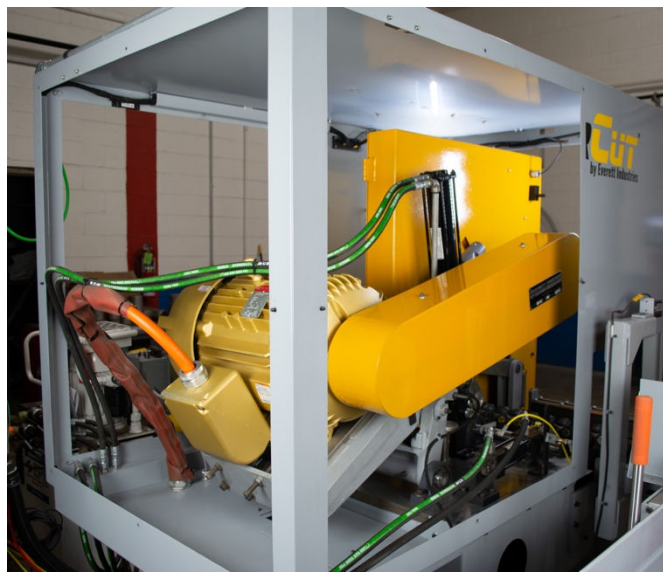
26" Saw Head with Feed Cylinder & 50HP Motor
